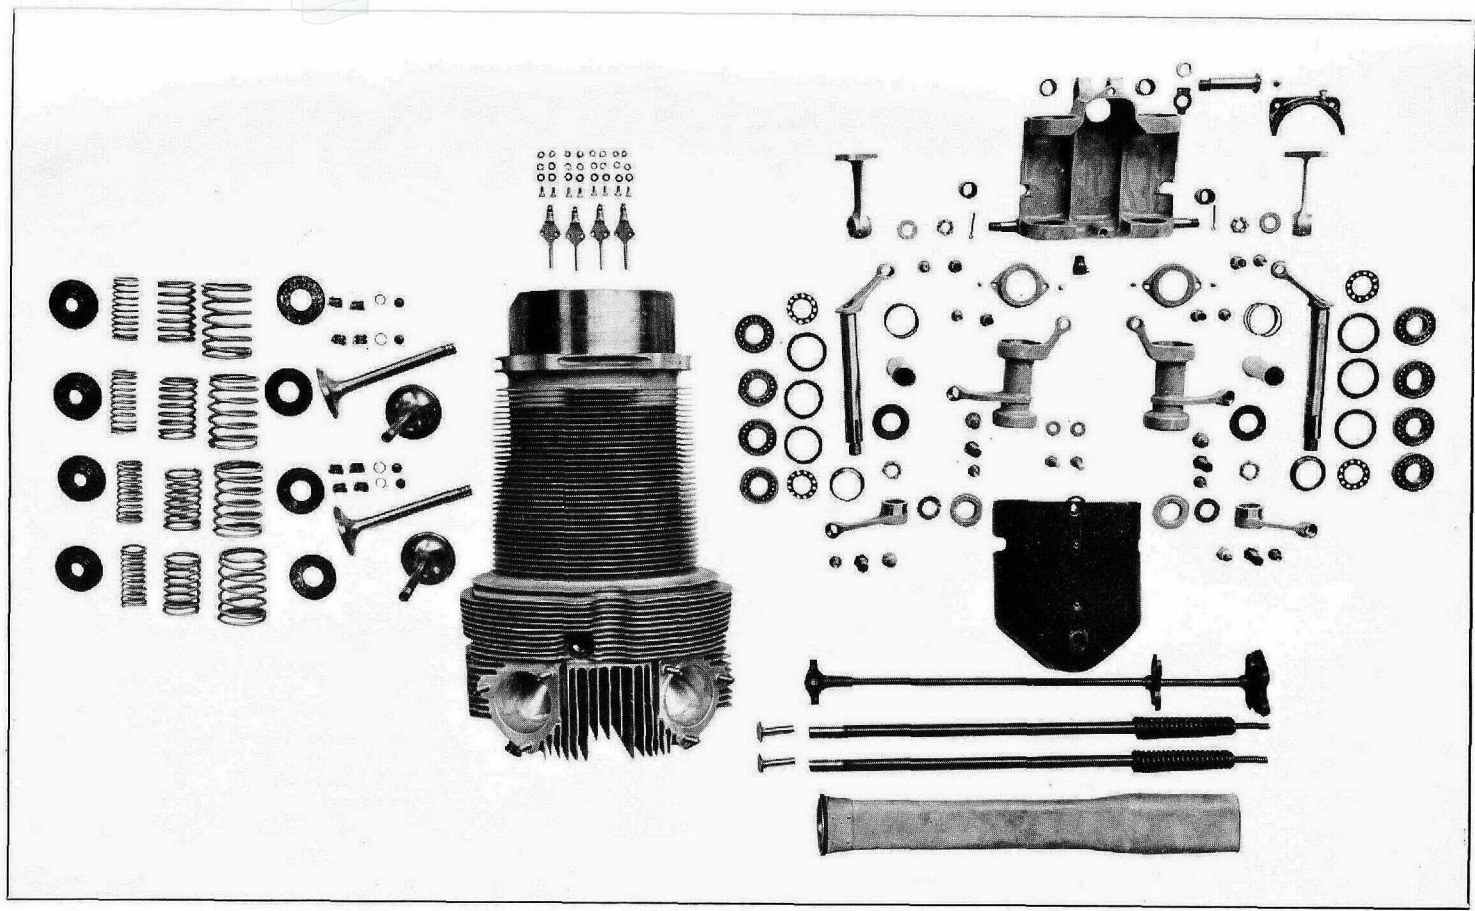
The parts of a poppet valved cylinder of a radial engine.
